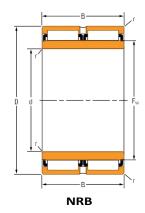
Heavy-duty needle roller bearing nomenclature.
